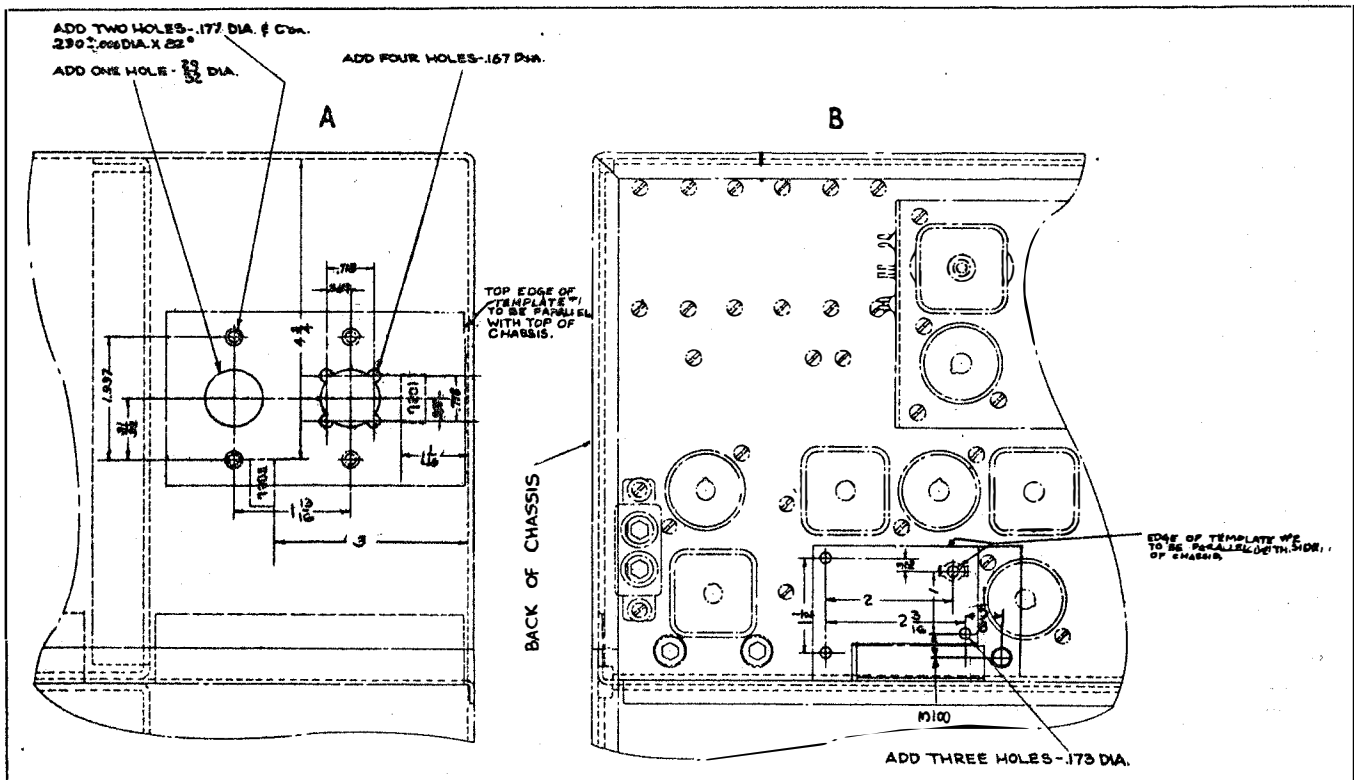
Coupling Kit. Receiver Chassis Drilling
